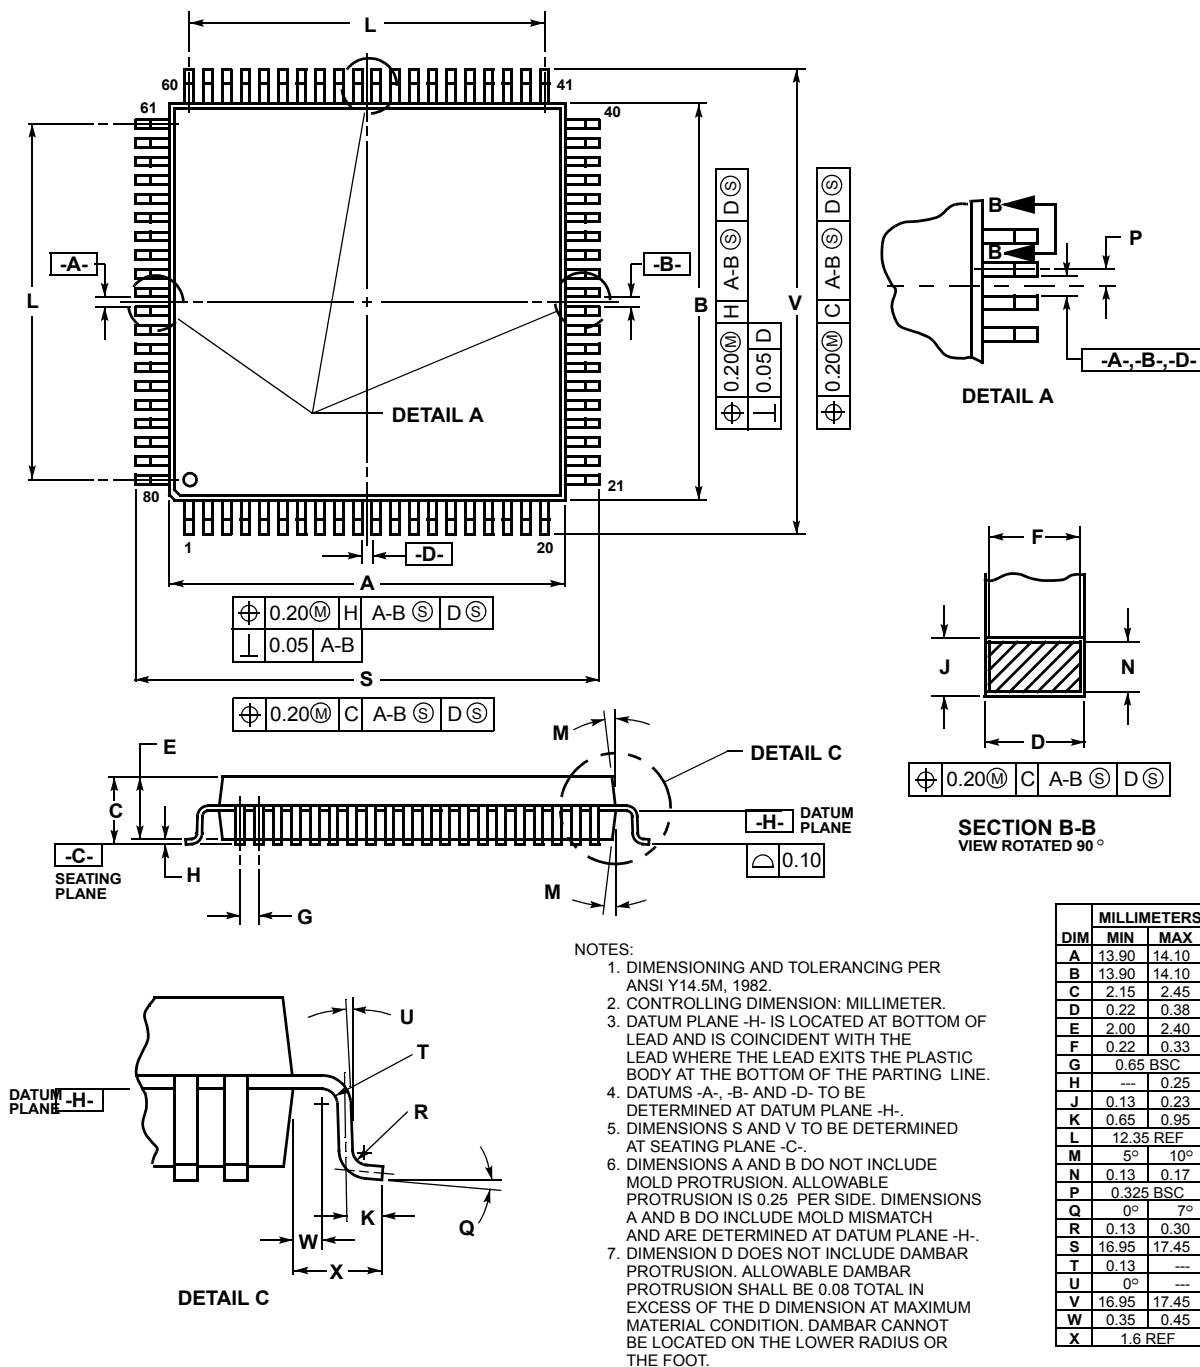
80-pin QFP Mechanical Dimensions (case no. 841B)
